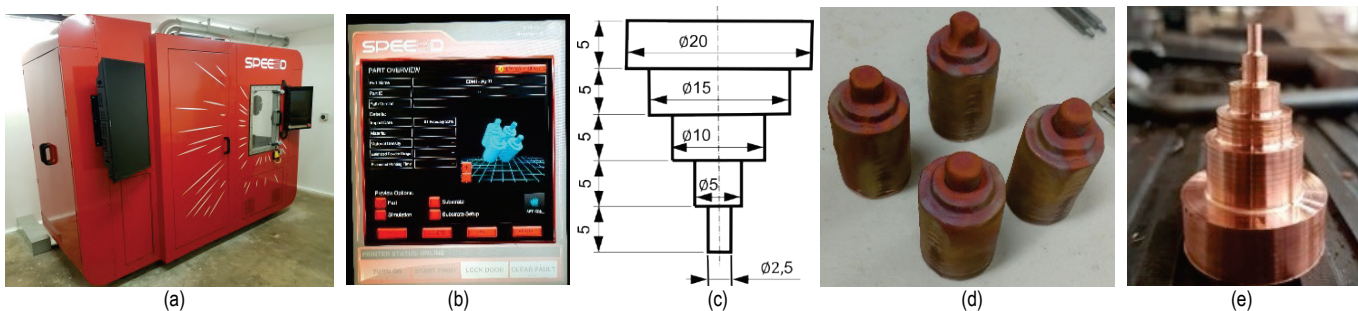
Electrodes were produced on the LightSPEE3D printer (a) using a pre-set geometry as displayed on the HMI (b), with dimensions given in mm (c). The as-printed samples (e) were then heat-treated according to Tab. 1, then machined on a lathe to produce the SP3D printed electrode (f).
